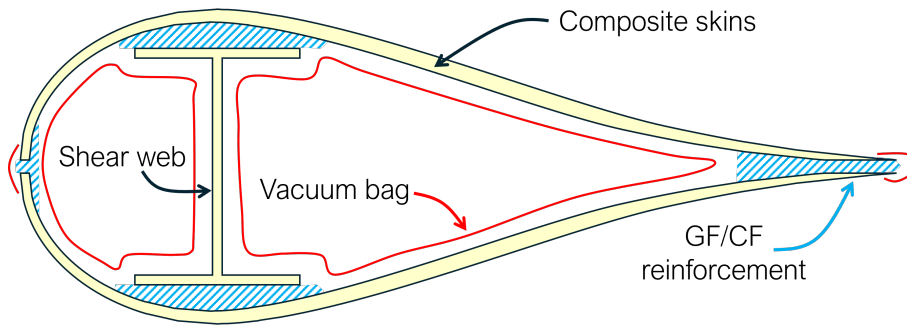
Cross section of a possible method for resin welding an acrylic-matrix wind turbine blade. Glass or carbon fibre reinforcement would be placed in the gaps between the blade shells and the shear web, and the bondlines sealed with vacuum bagging (e.g. a vacuum bag film tube) before infusion of acrylic resin.
